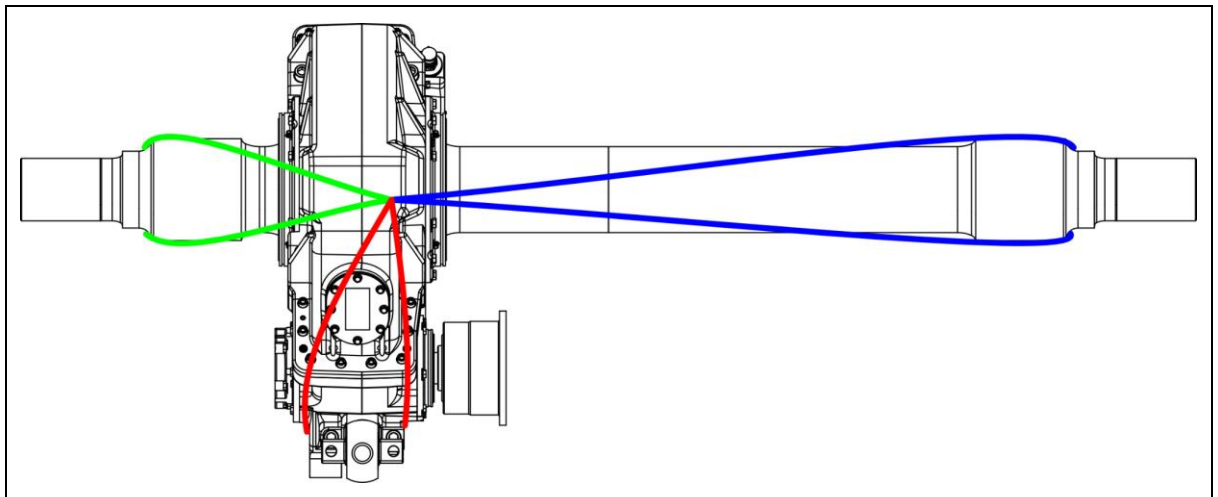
Lifting points for Traction Gearbox assembled to wheelset shaft
